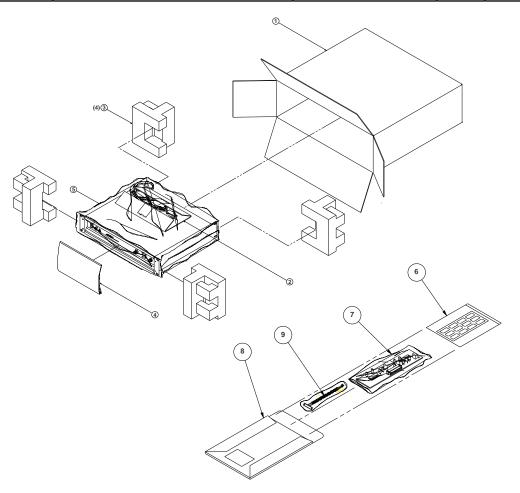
1800-V Amplifier and EQ Card Packaging Illustration
